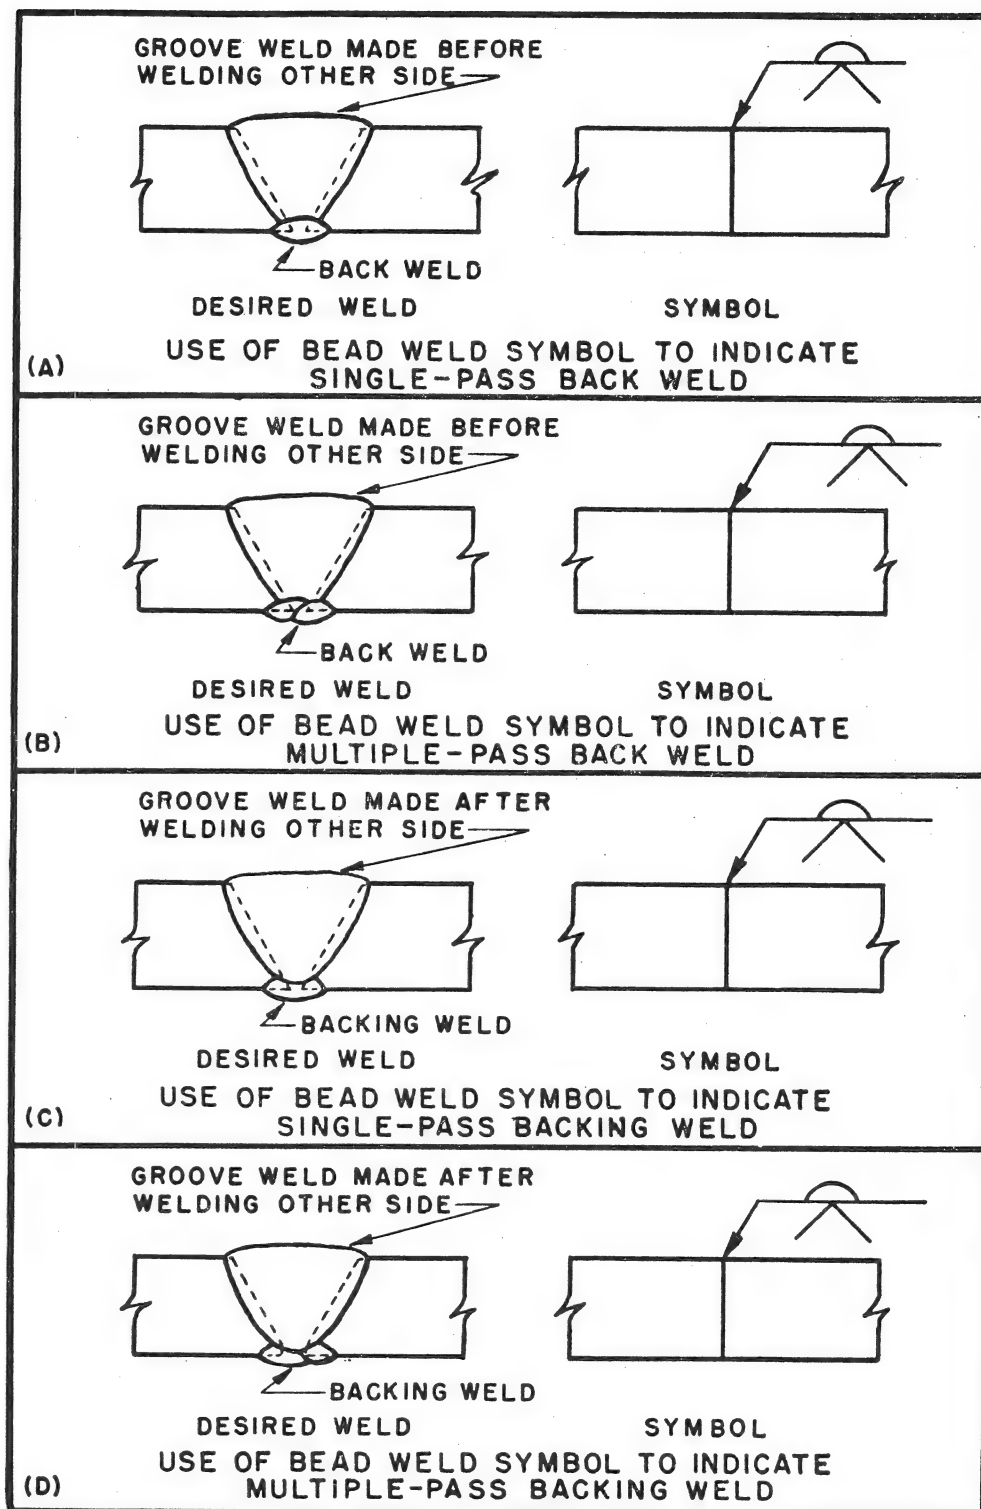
Application of Bead Weld Symbol to Indicate Bead-Type Back and Backing Welds
